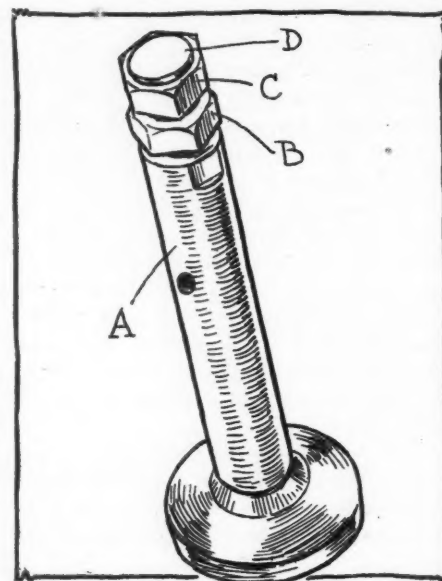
ADJUSTMENT OF E-M-F PUSHROD
